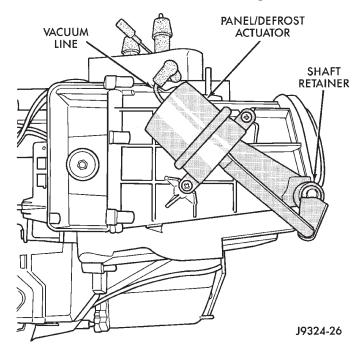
Panel/Defrost Door Vacuum Actuator Remove/Install
